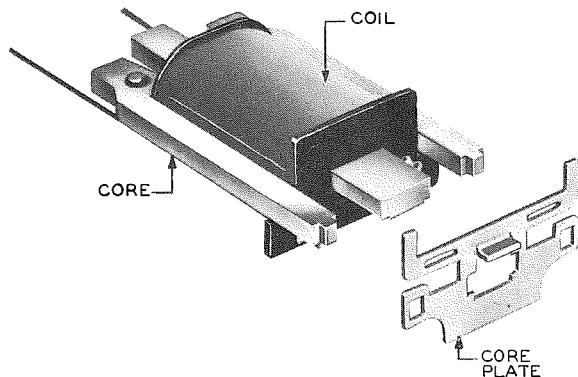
AF, AG, or AJ Relay Coil Assembly and Core Plate
